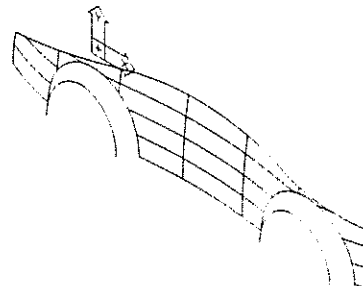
Wires moved, surface trimmed by projected elliptical wires
